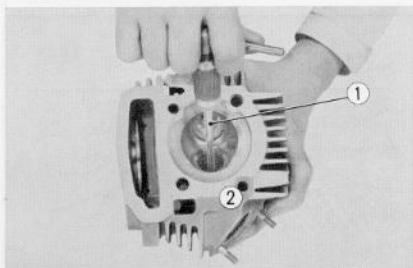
① Valve guide reamer ② Cylinder head
